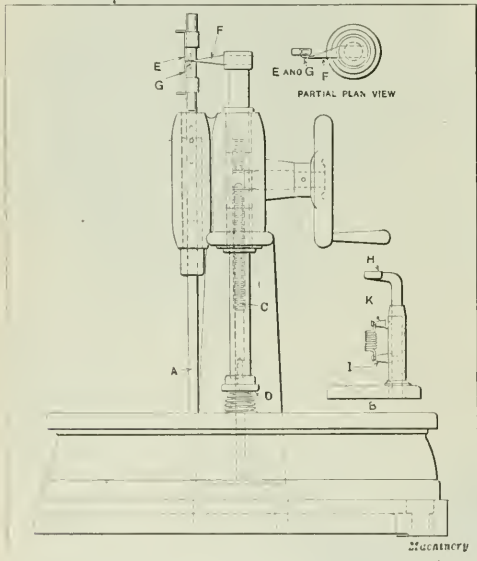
Assembled View of the Spring Testing Fixture and Auxiliary Gaging Device for Coil Tension Springs
